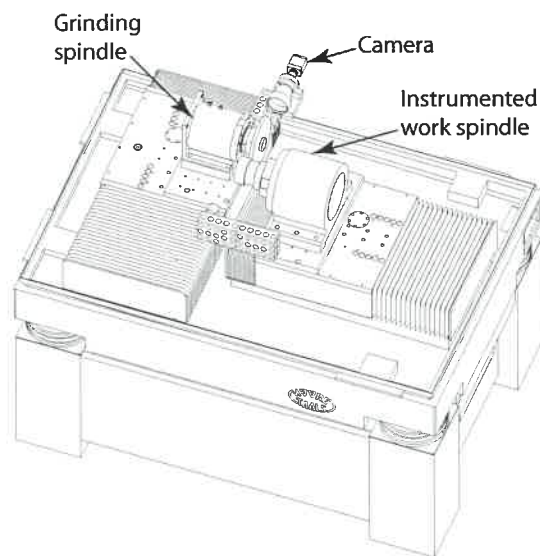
Ultra precision lathe UPL 350 test bed mounted with an instrumented work spindle, grinding wheel spindle synced with a camera.
